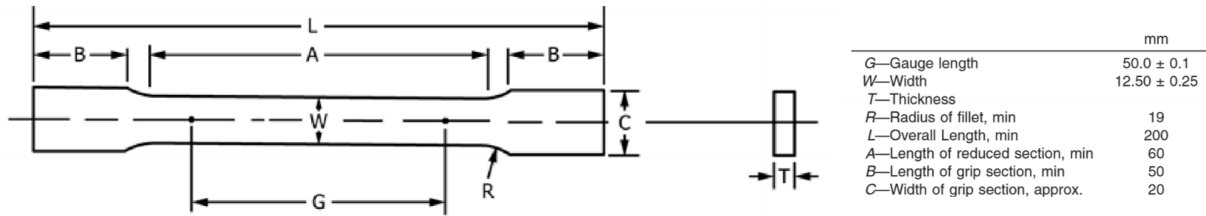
Tensile test specimen geometry according to ASTM E345 [37]
